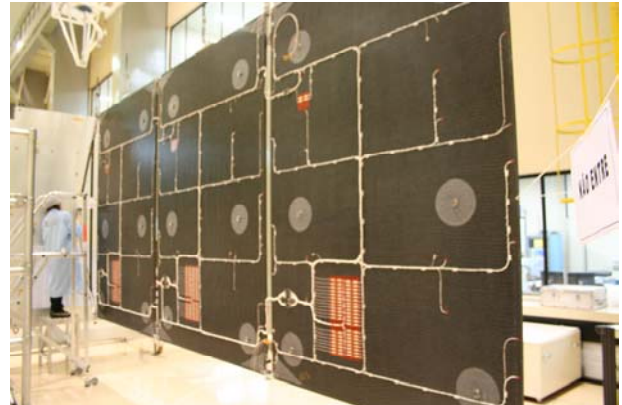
Assembled CBERS-2B solar array wing – rear side view.
